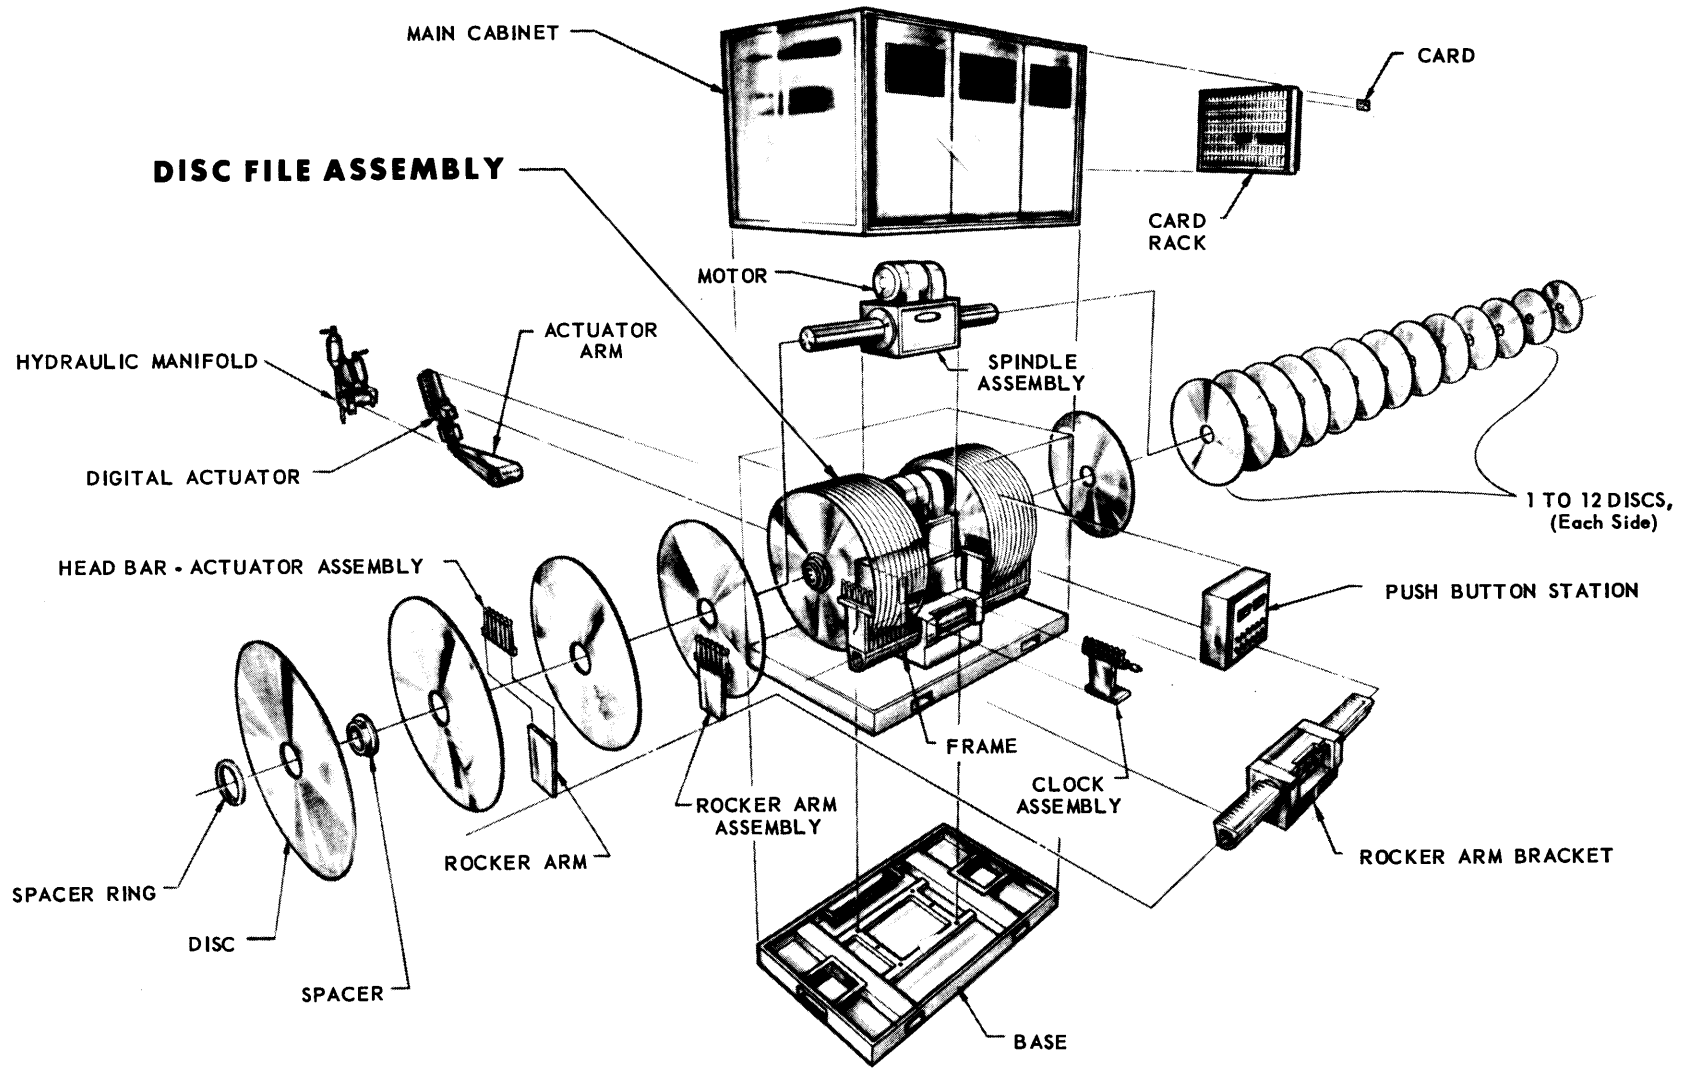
EXPLODED VIEW OF A BRYANT SERIES 4000C DISC FILE
